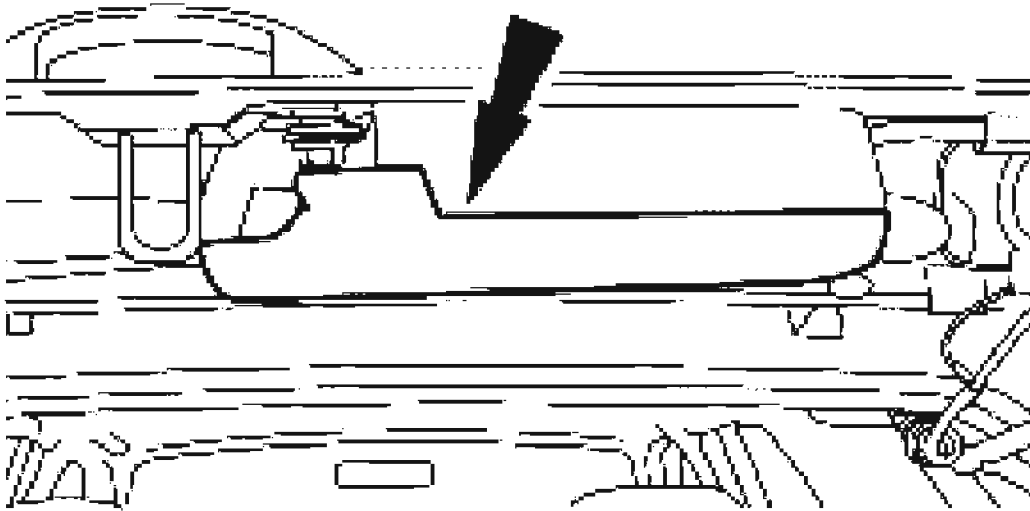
Removing Rear Wiper Motor Shaft Nut Cover
